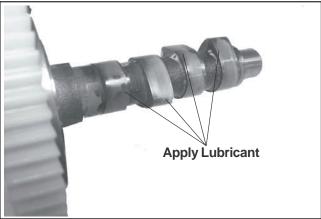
Apply Camshaft Lubricant to Cam Lobes.
